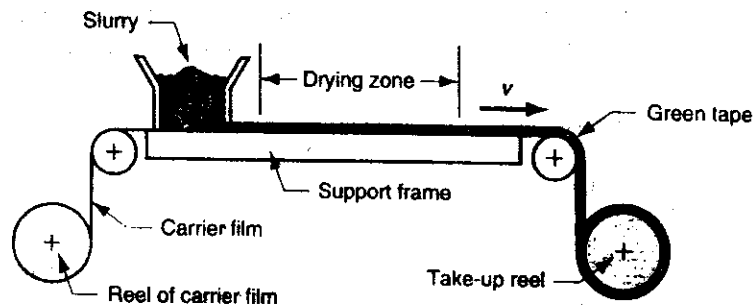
Tape casting for Ceramic sheet manufacturing
